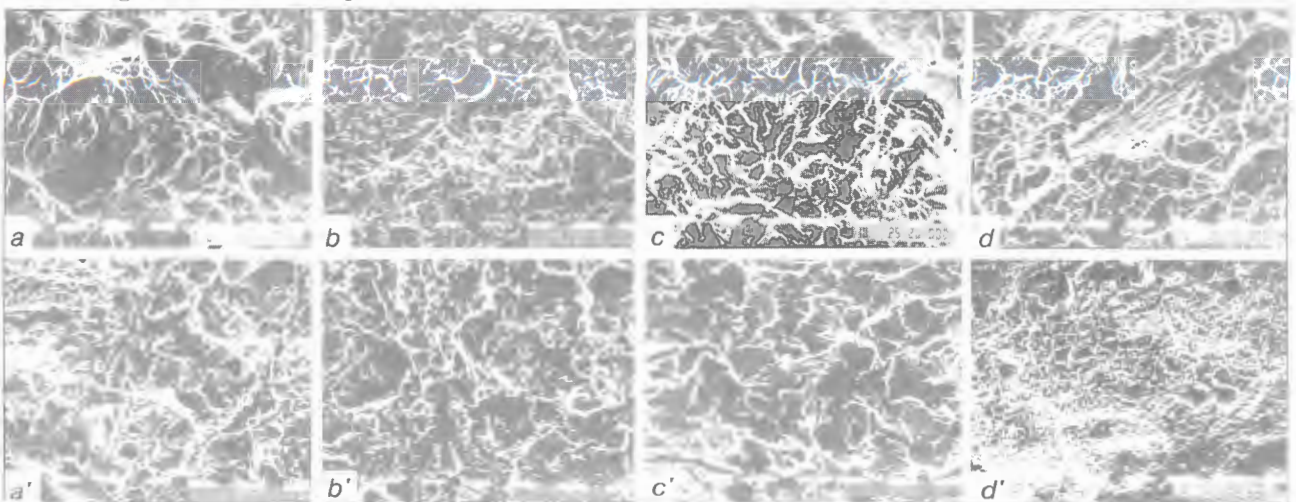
Fractogram of welds (*a - d*) (see Figure 1) and HAZ metal (*a' - d'*) when making these welds
